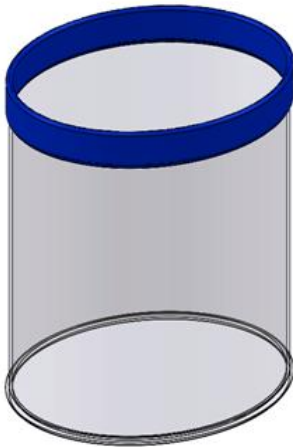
Design 1 is a revised Alexis® device with oval rings and a shorter tube.
